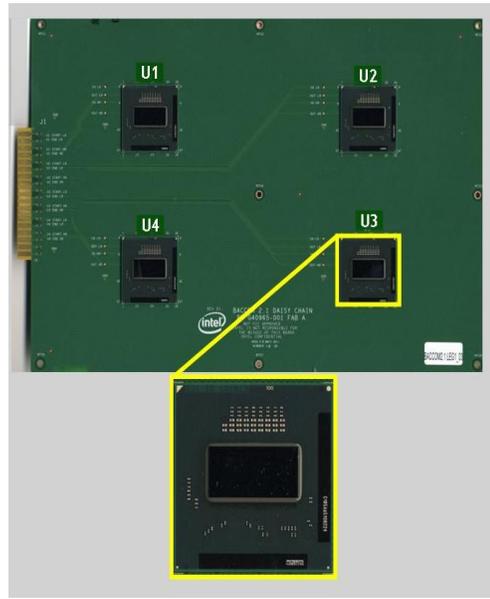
Top views of the populated printed circuit board and the BGA Package Test Vehicle.
